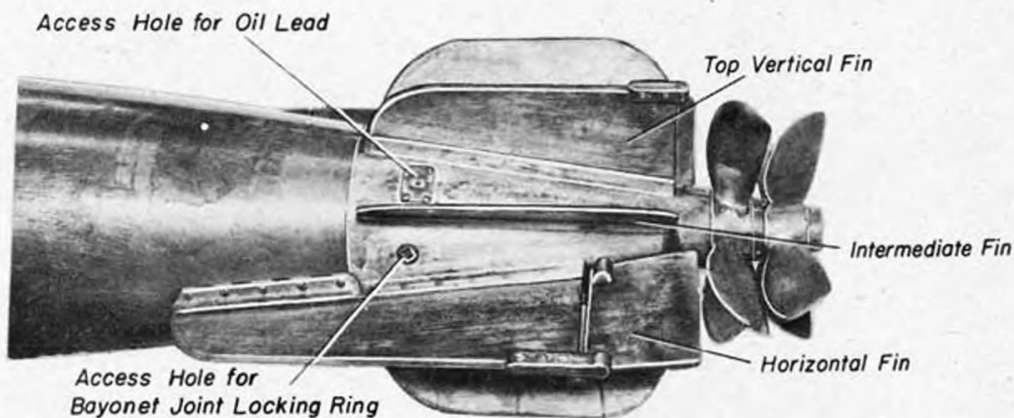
Torpedo Type 91 Mod 3, Tail Section
